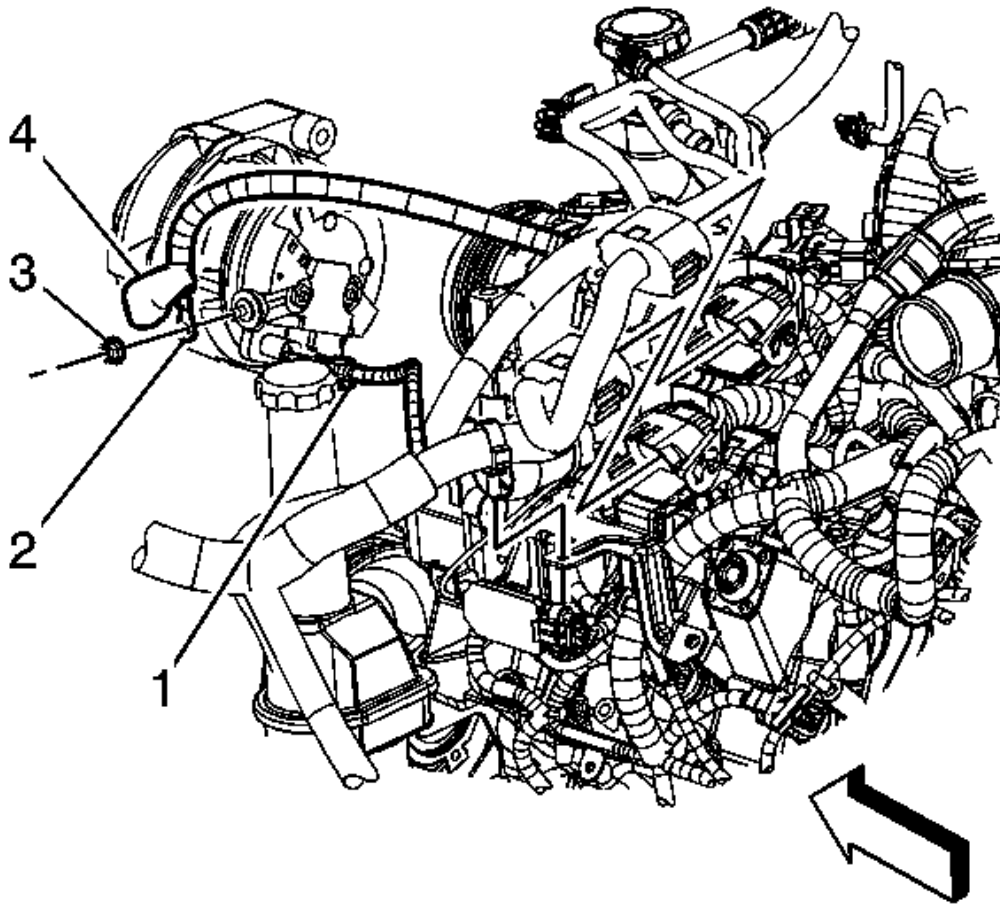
View Of Engine Wiring Harness Electrical Connector, Terminal, Boot & Nut
